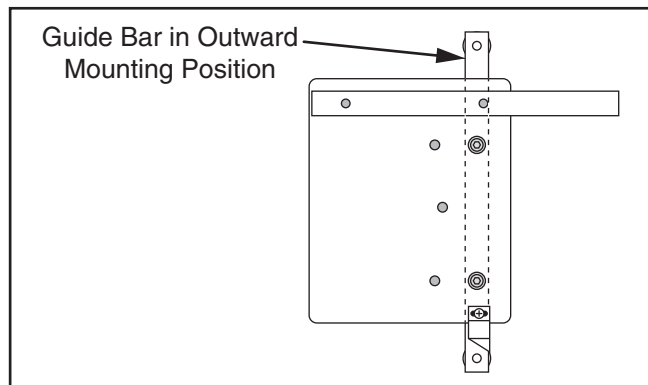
Guide bar in outward mounting position (slide plate shown removed for clarity).
